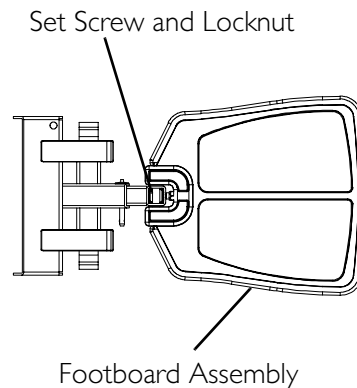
Removing/Installing the Footboard Assembly
